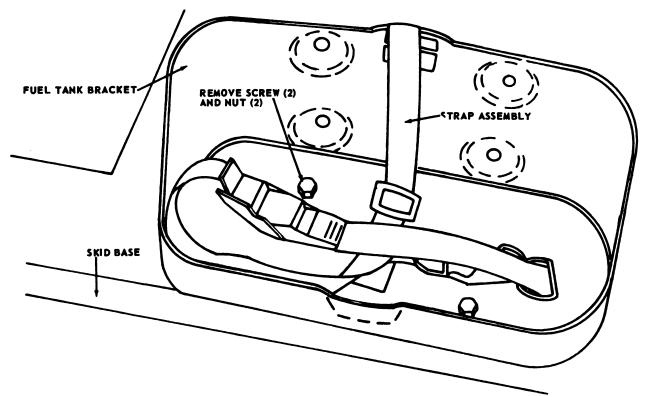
Fuel tank bracket and strap assemblies, removal and installation (Model MEP-018A).
